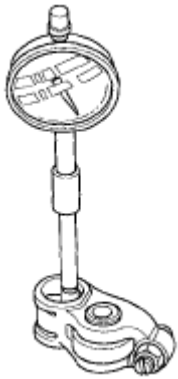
Measuring Inside Diameter Of Rocker Arm
